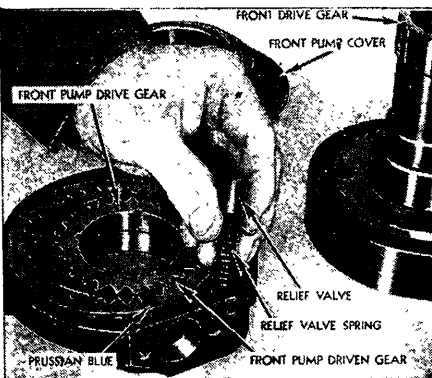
Remove relief valve and spring from front pump body. Mark top face of driven (output) gear with prussian blue for identification when assembling. Remove gear
